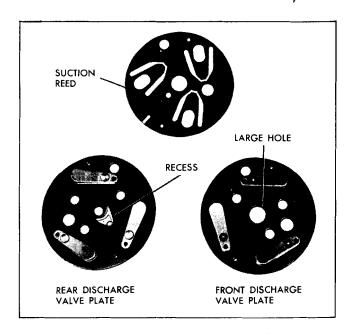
A-96 Identification of Front and Rear Discharge Valve
